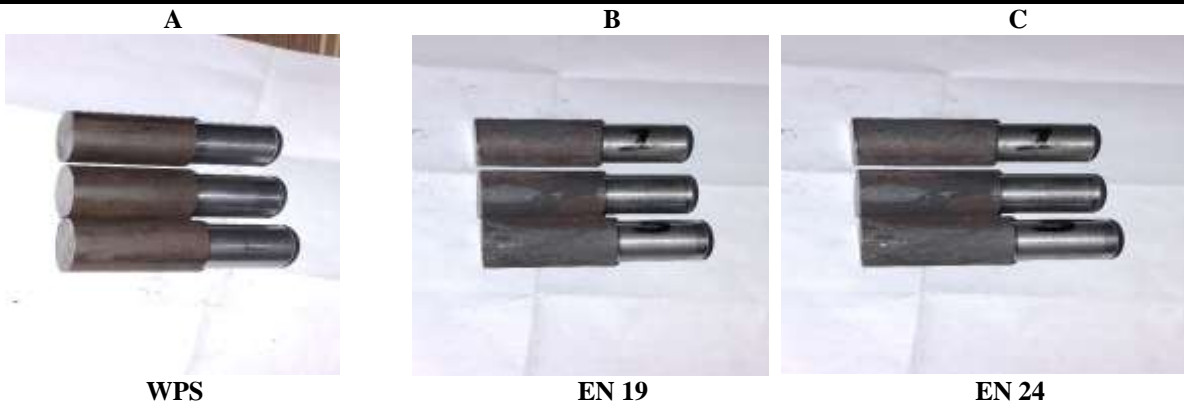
Prepared Work piece sample using materials EN-19, EN-24, WPS
